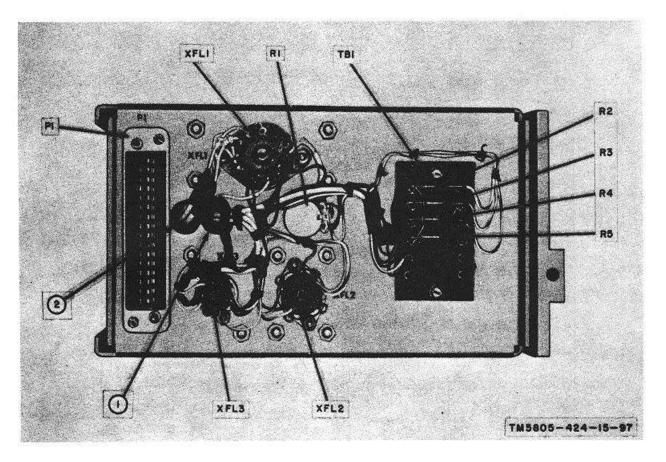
Plug-in module of Modem Subassembly MX-73(\*)/G, bottom view.
